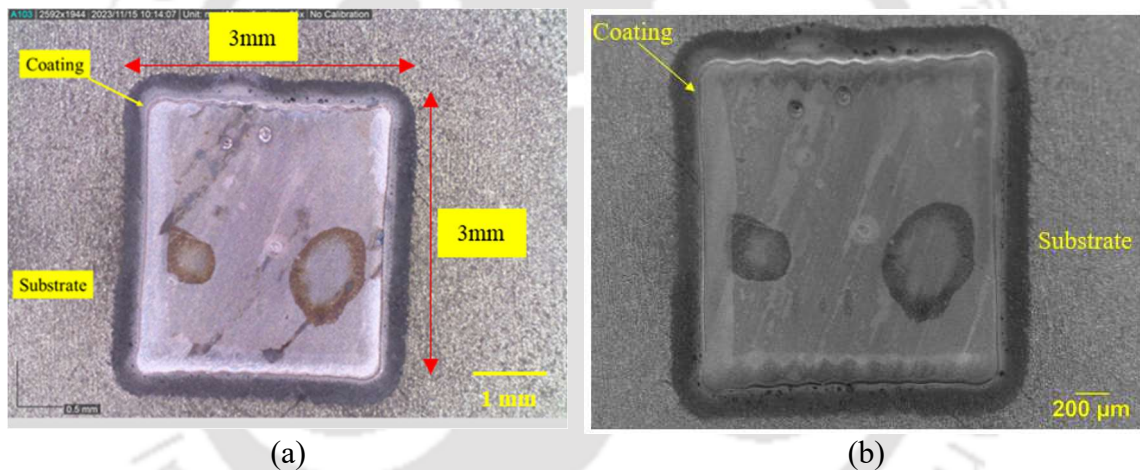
(a) Coating by SJED method and (b) macroscopic image of coating
